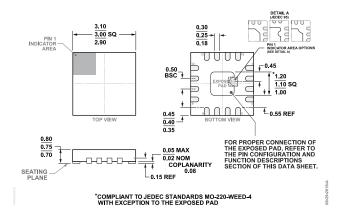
16-Lead Lead Frame Chip Scale Package [LFCSP] 3 mm × 3 mm Body and 0.75 mm Package Height (CP-16-45) Dimensions shown in millimeters
